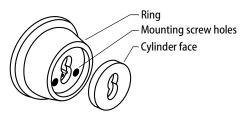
Installing the cylinder face for doublekeyed deadbolts and deadbolts with concealed screws
